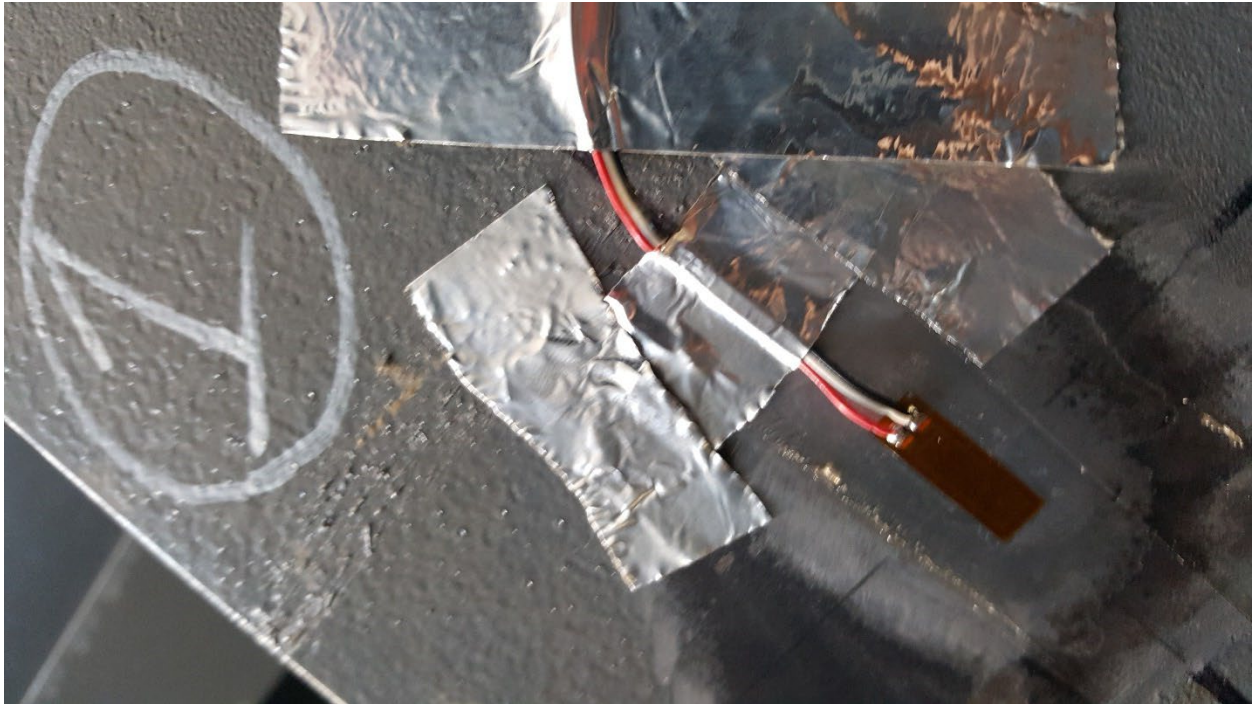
SGBF1 Front of Bottom Flange of A-end Body Bolster near Center Sill, LH Side
